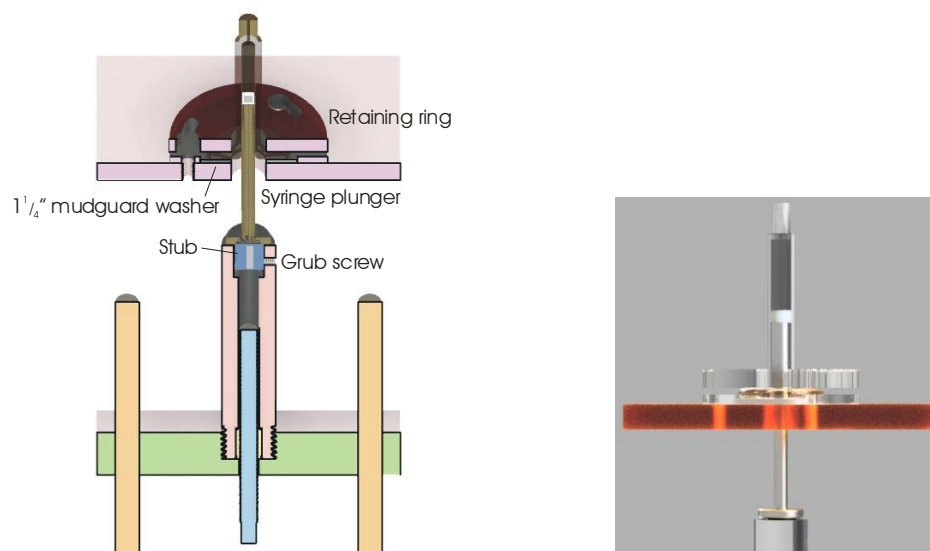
Details of the attachment of the gas-tight syringe to the stepper motor drive assembly. Cross-section view (left) and CAD rendered view (Right). The flanged part of the syringe barrel is tethered to the top layer of the assembly by clamping between a washer and retaining ring.
